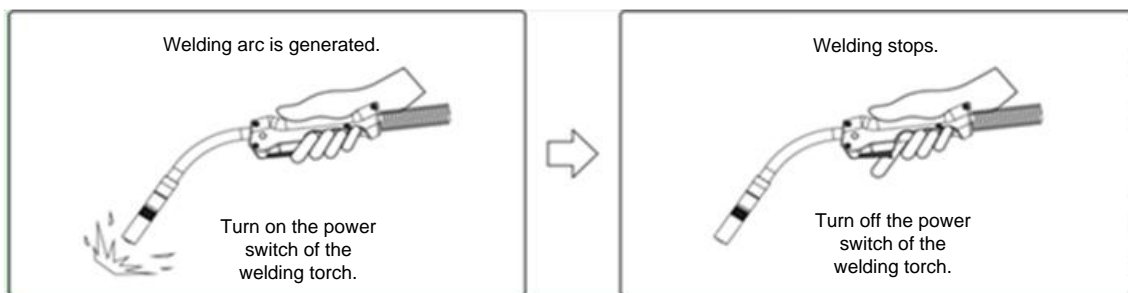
Schematic diagram of welding with ending arc
